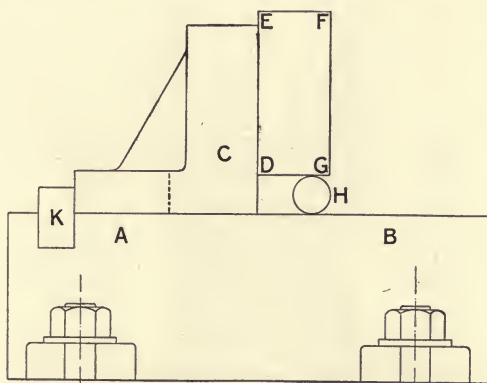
SECONDARY PIECES ON MAGNETIC CHUCK
